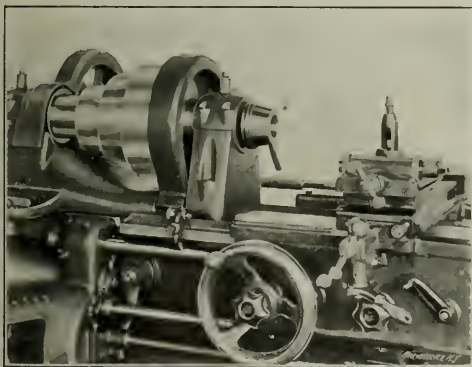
Quick Withdrawing Mechanism, Micrometer Stop, Elevating Toolpost, Etc.
